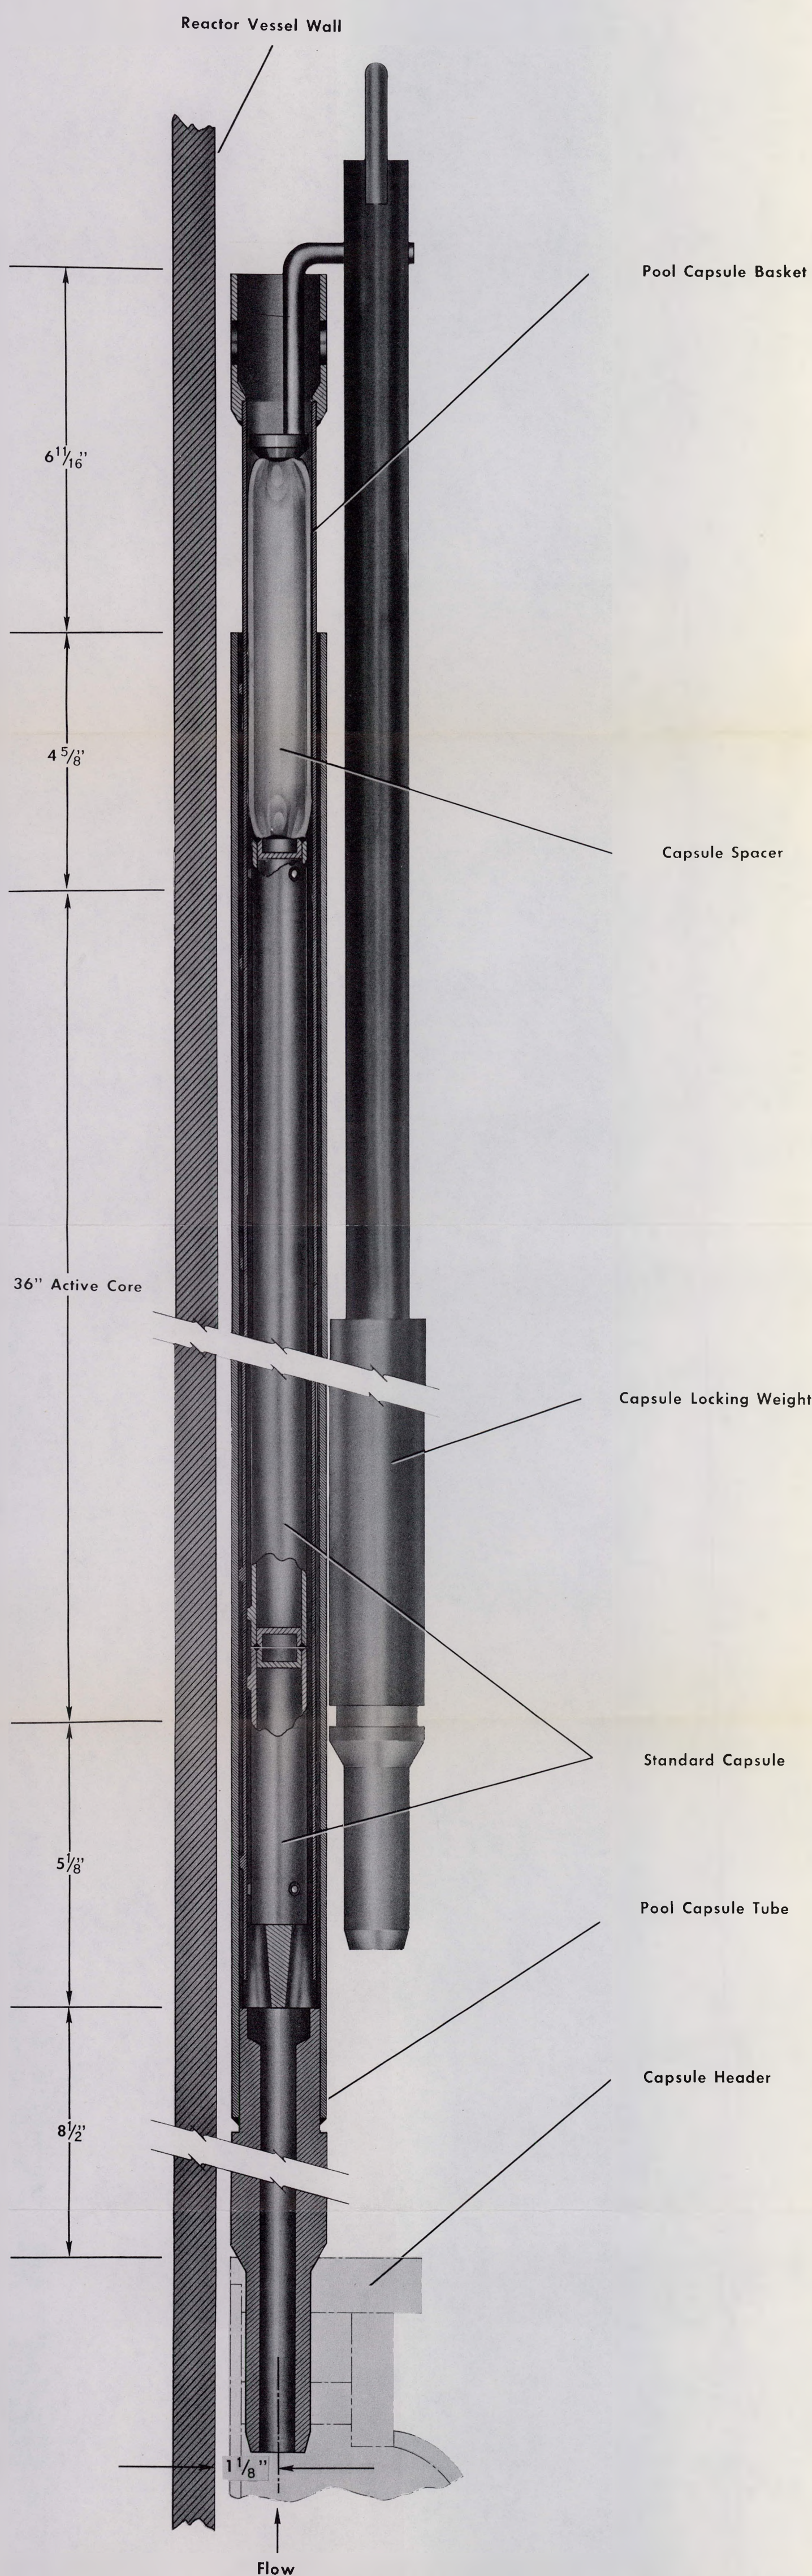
TYPICAL POOL CAPSULE ASSEMBLY
